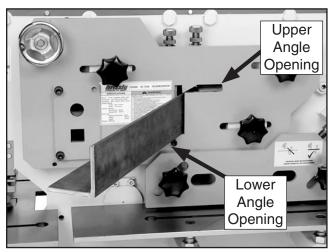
Example of angle iron shearing setup to make a 90° cut.
